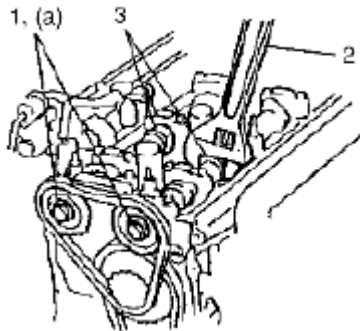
Identifying Camshaft Timing Sprocket Bolt
